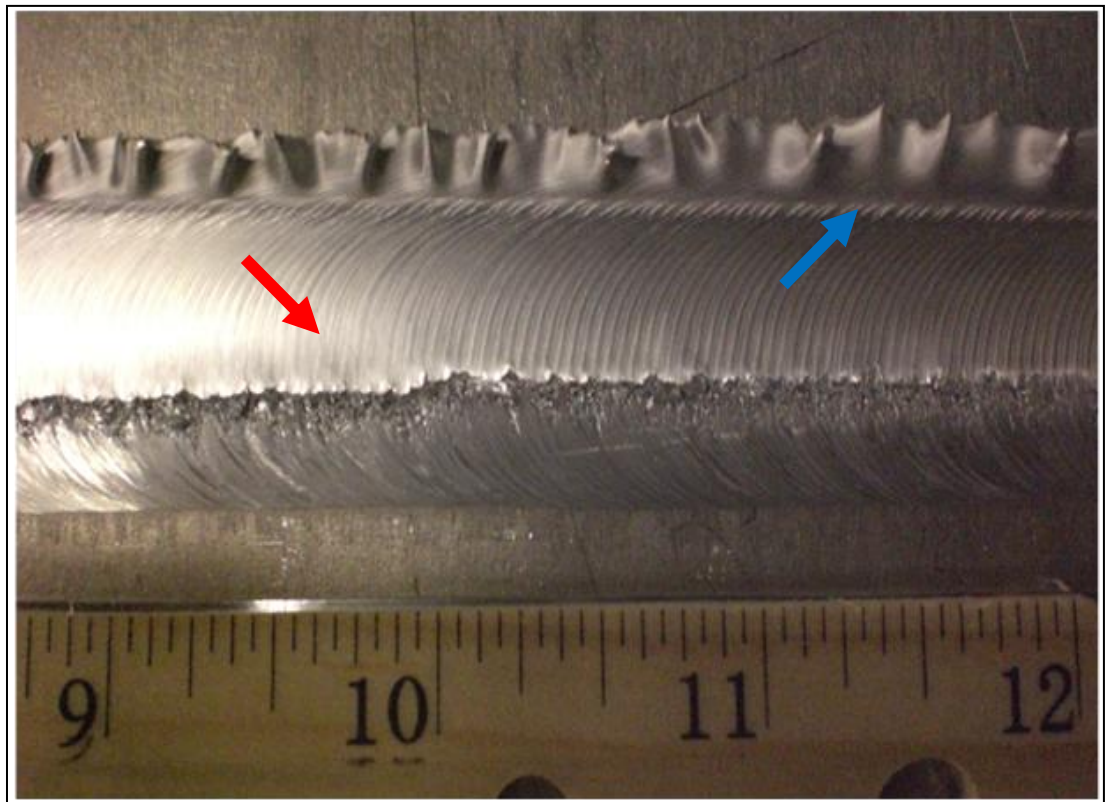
Flash and visible wormhole defects in the crown of a friction stir welded joint. Flashing defect (indicated by blue arrow) is the lip formed next to the weld due to excessive tool plunge force. Visible wormholes (indicated by red arrow) are internal cavities that extend to the surface.
